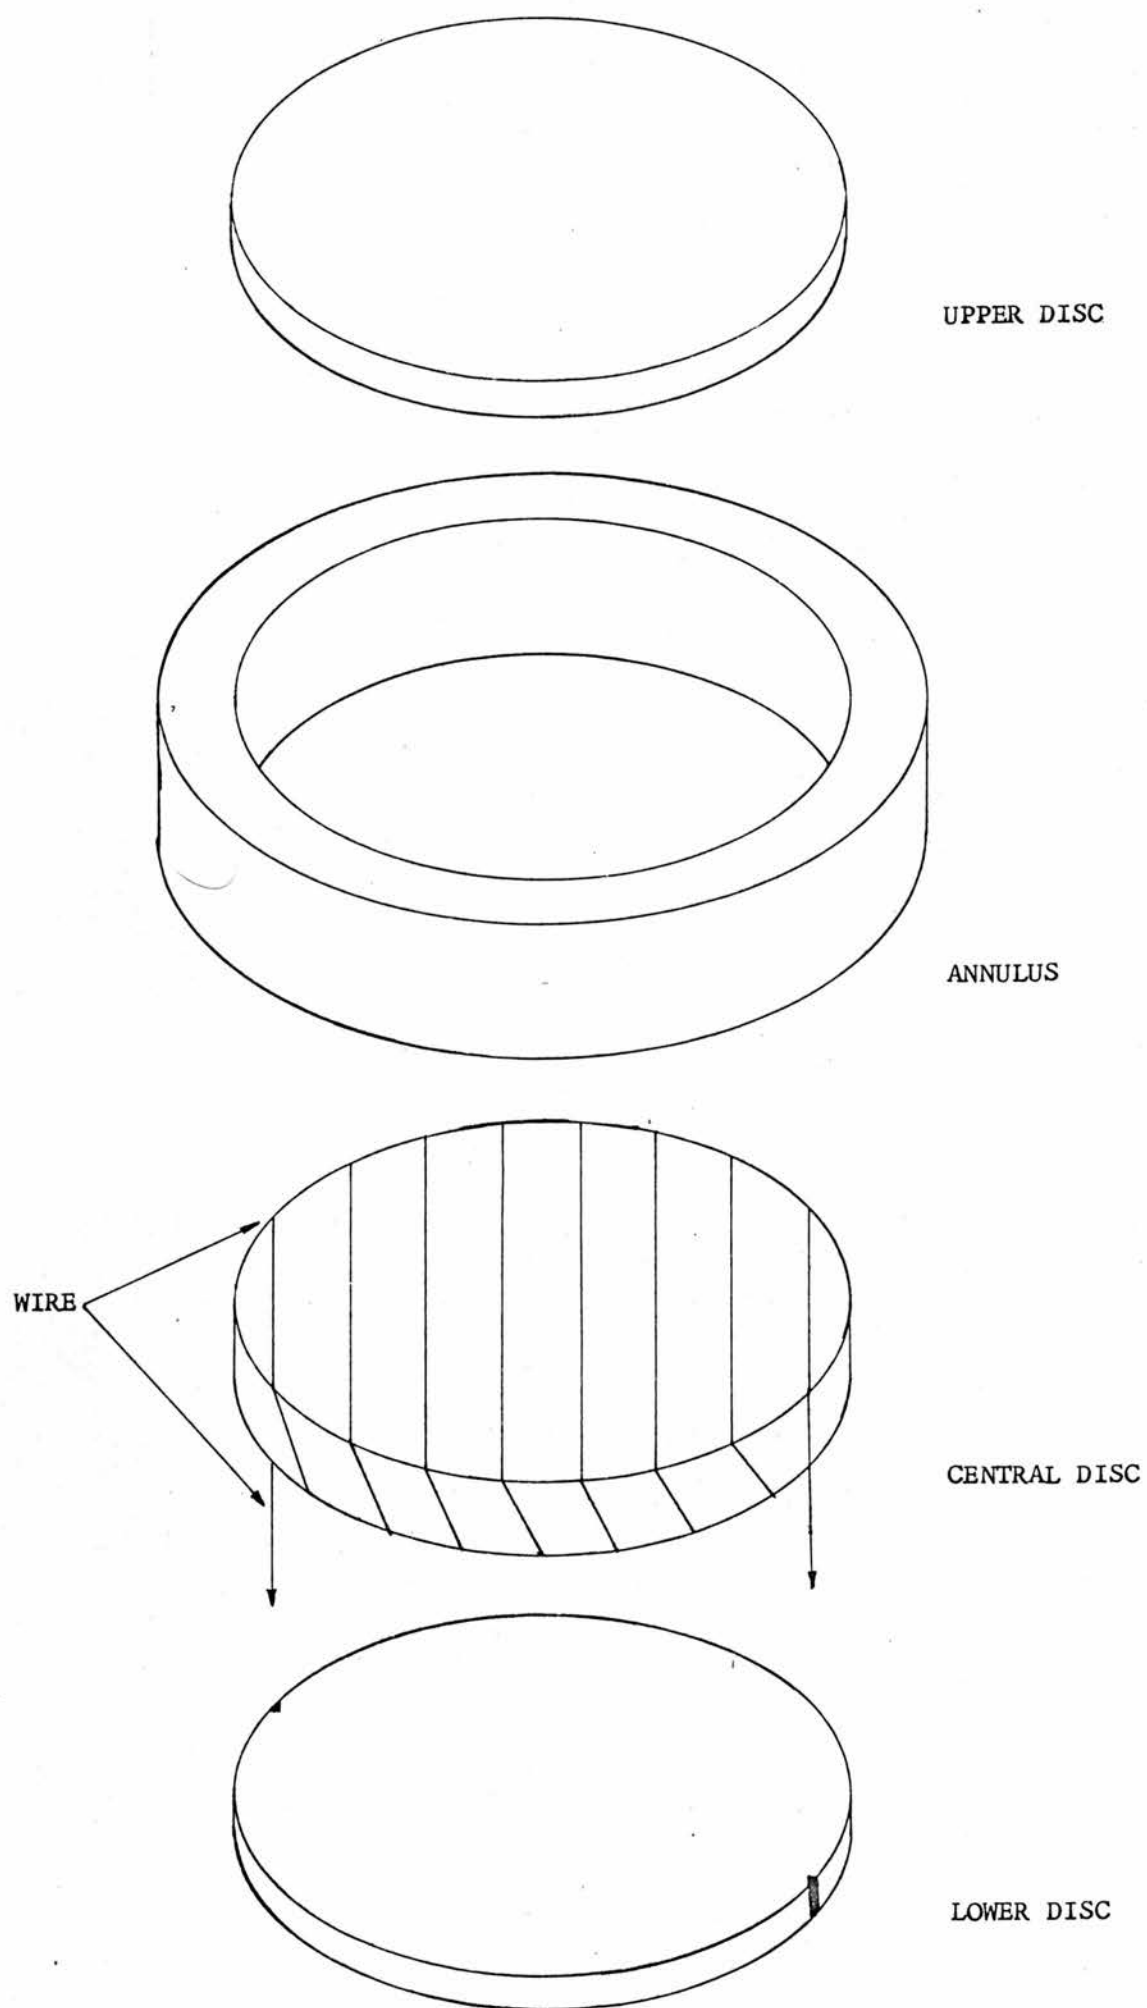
EXPLODED VIEW OF MK I ABSORBER
